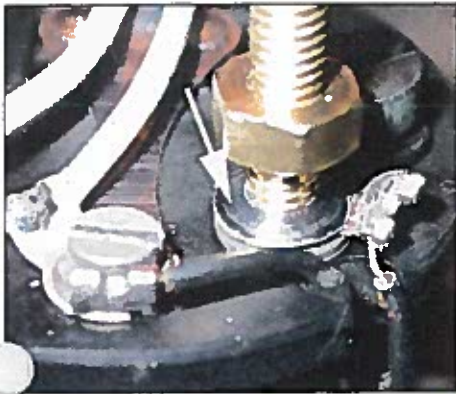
In this photo the brass nut has been backed off to show how the lead washer is crushed when the nut is tightened, creating a locking of the assembly. This is how the things will appear when disassembling a factory-built pump. The lead washer must be cut with a sharp blade in order to free the terminal post and remove the pedestal from the coil.
